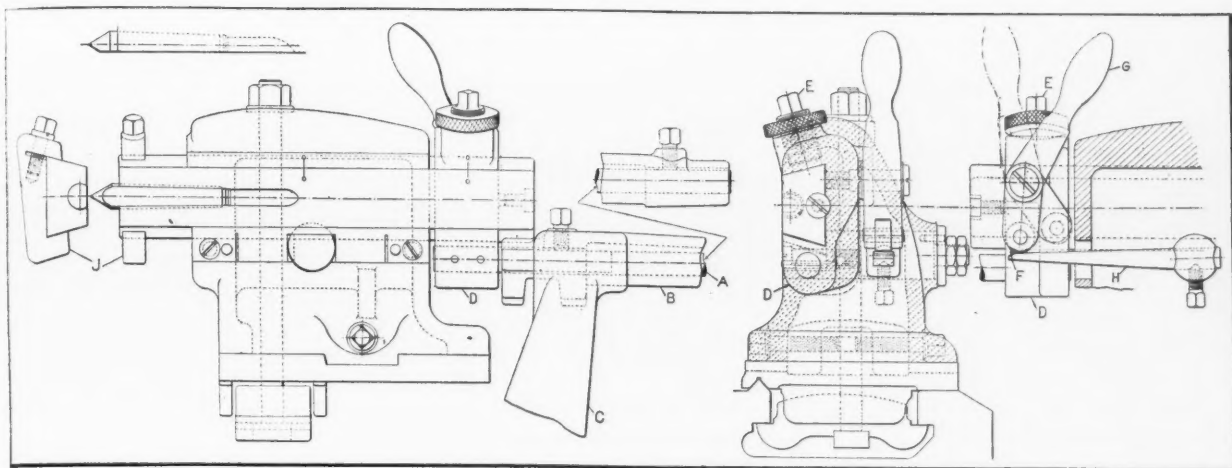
Details of Tailstock employed on Machine shown in Fig. 24
